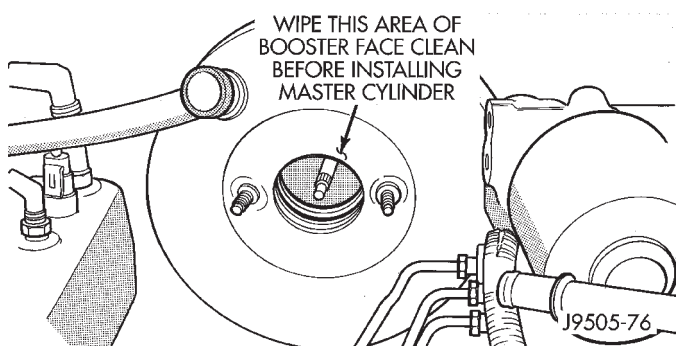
Cylinder Mounting Surface Of Brake Booster
